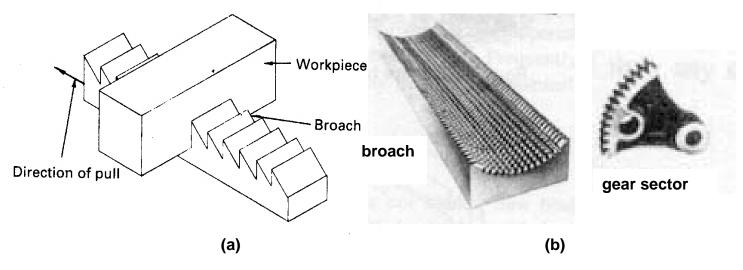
Typical external broaching (a) making slot (b) teeth of gear sector
